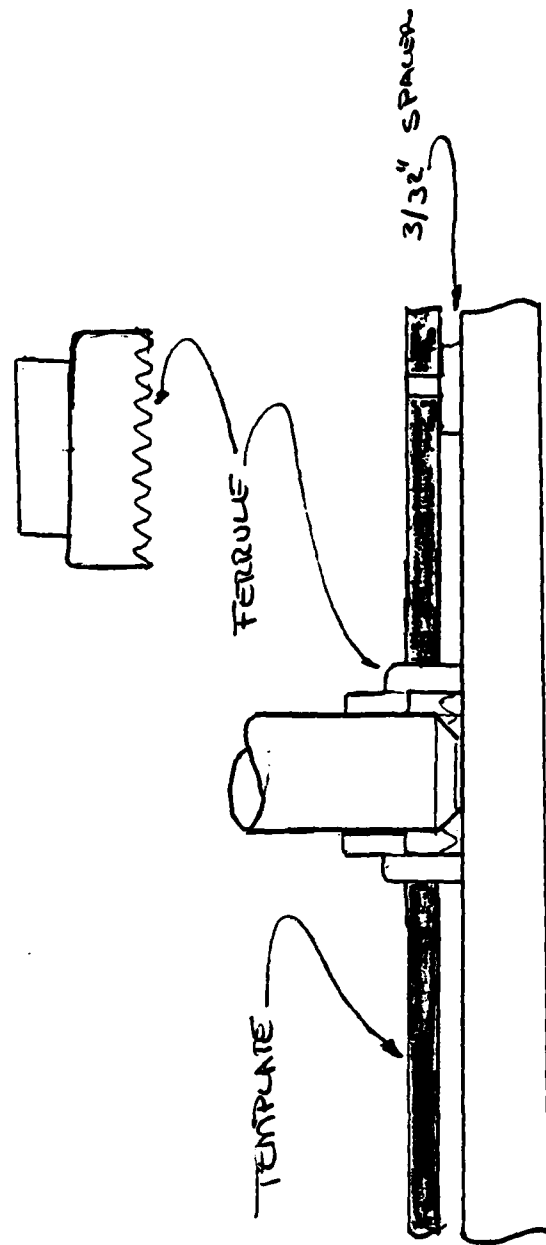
STANDARD SURFACE STUD WELDING TEMPLATE
